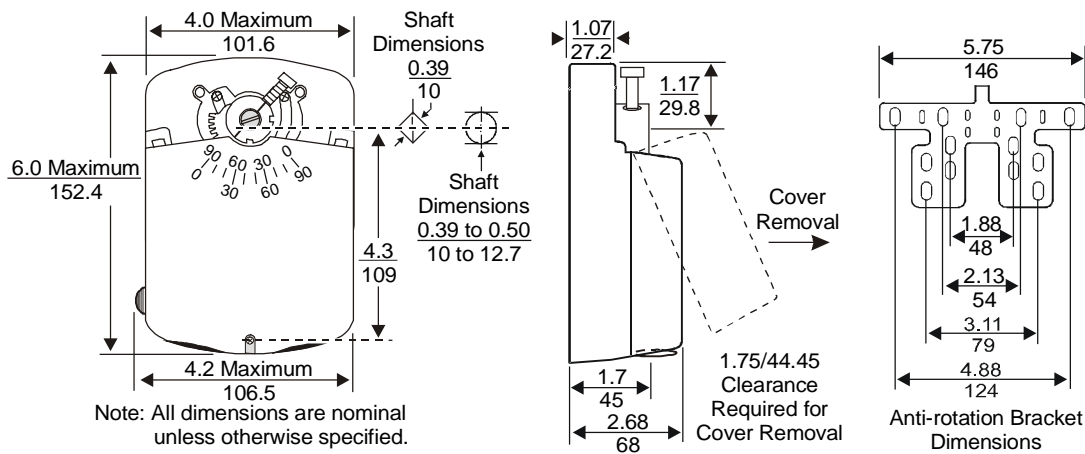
Actuator and Anti-rotation Bracket Dimensions, in. (mm)
